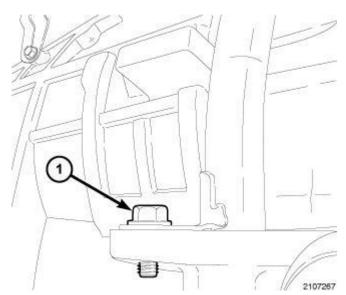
Lower Transmission Fill Tube Bolt Courtesy of CHRYSLER LLC
